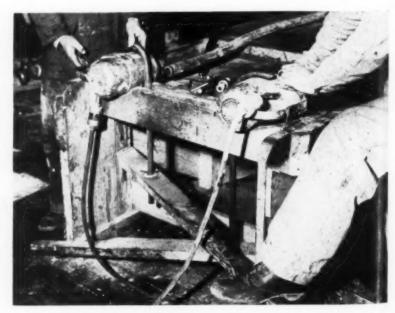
MOTOR END OF BENCH has quick-acting clamps for holding motor frames for dissembly, inspection and minor repairs.
